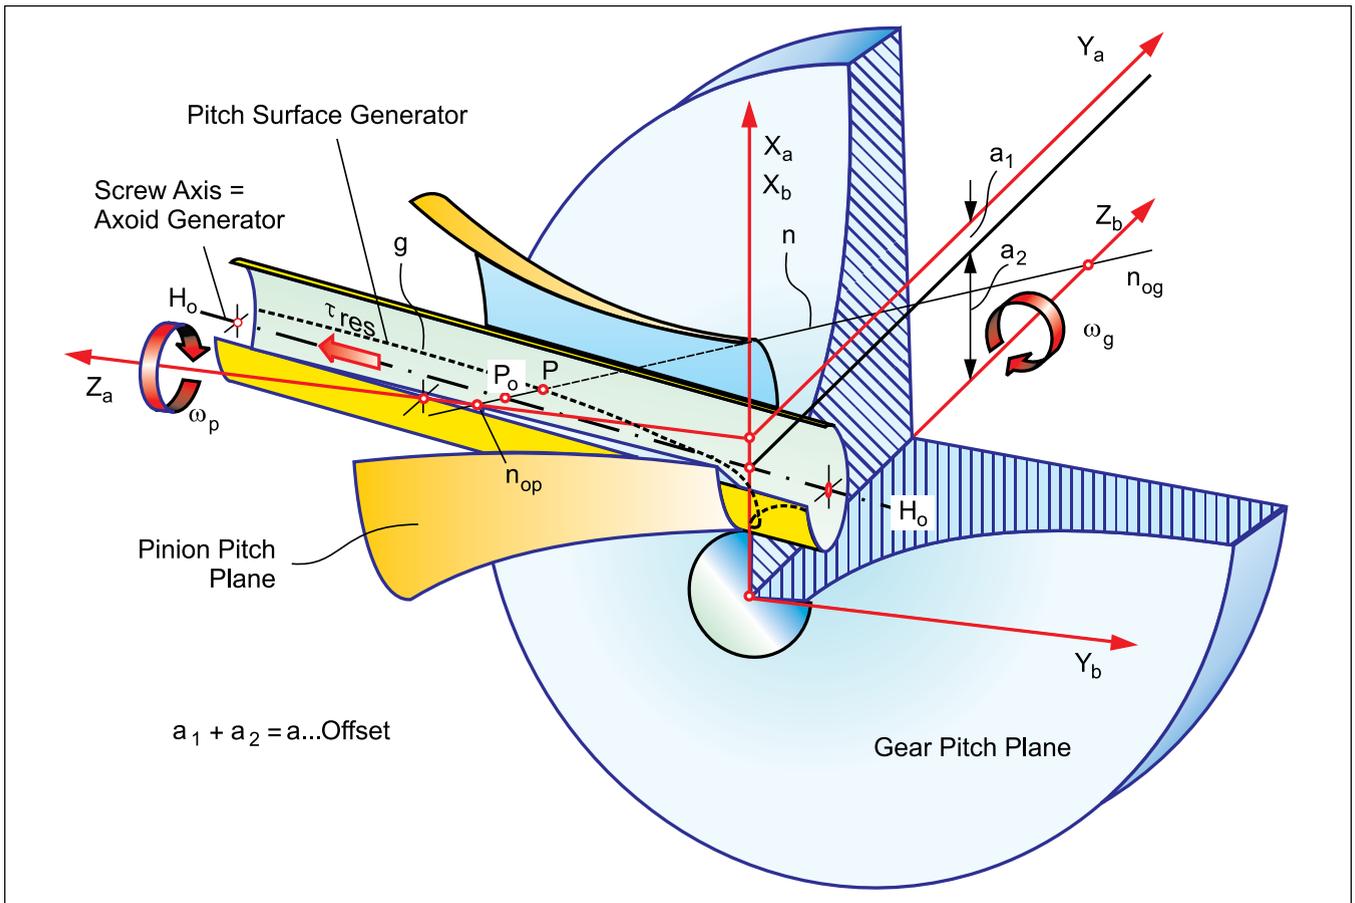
Axoids and pitch surfaces in gears with screw motion.
